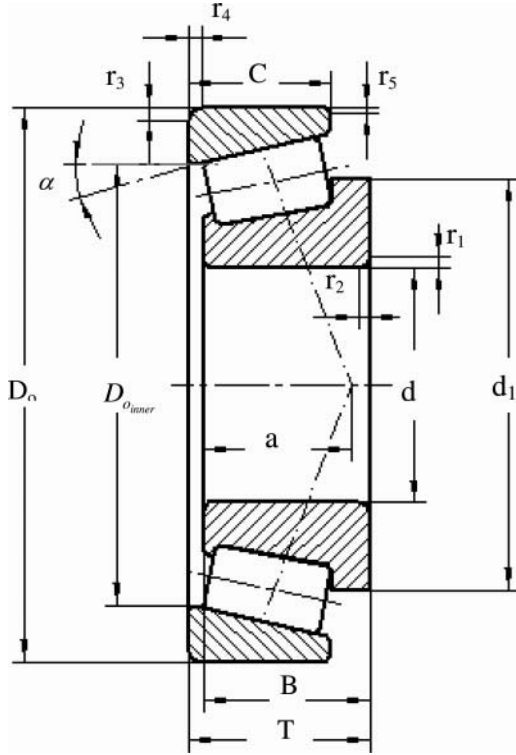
Nomenclature of single row tapered roller bearing with the boundary dimensions of BIS.
